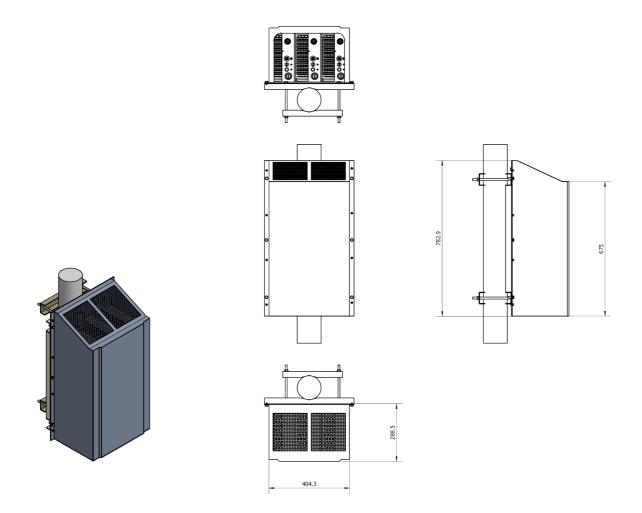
3 Remote Unit Assembly With Solar Shell
